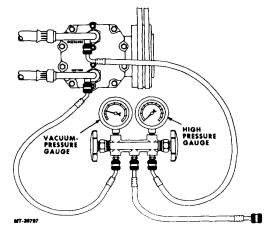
Manifold and Garage Set Connected to Compressor Service Port
